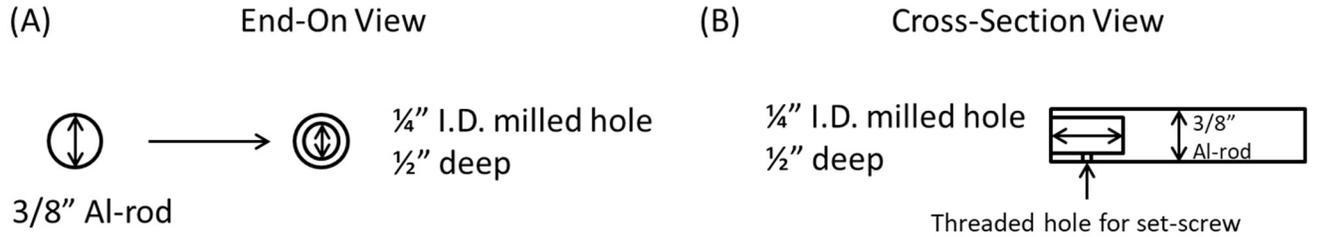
Aluminum rod milling schematics showing (A) end-on view for motor drive shaft and (B) cross section for situating the setscrew to hold the rod to the drive shaft of the motor.
